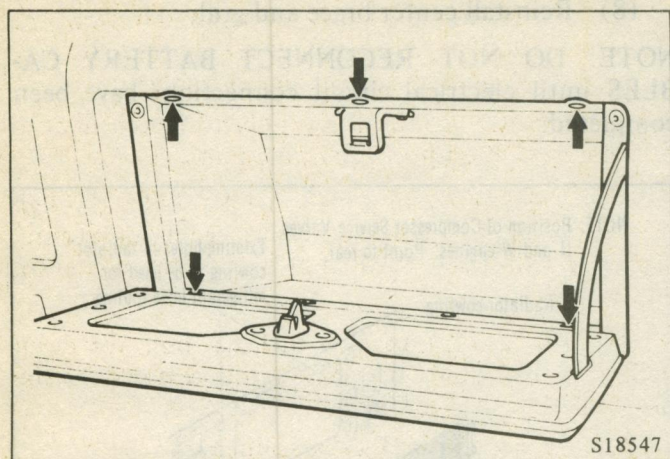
Removal of Glove Box and Right-hand Louver Assembly
